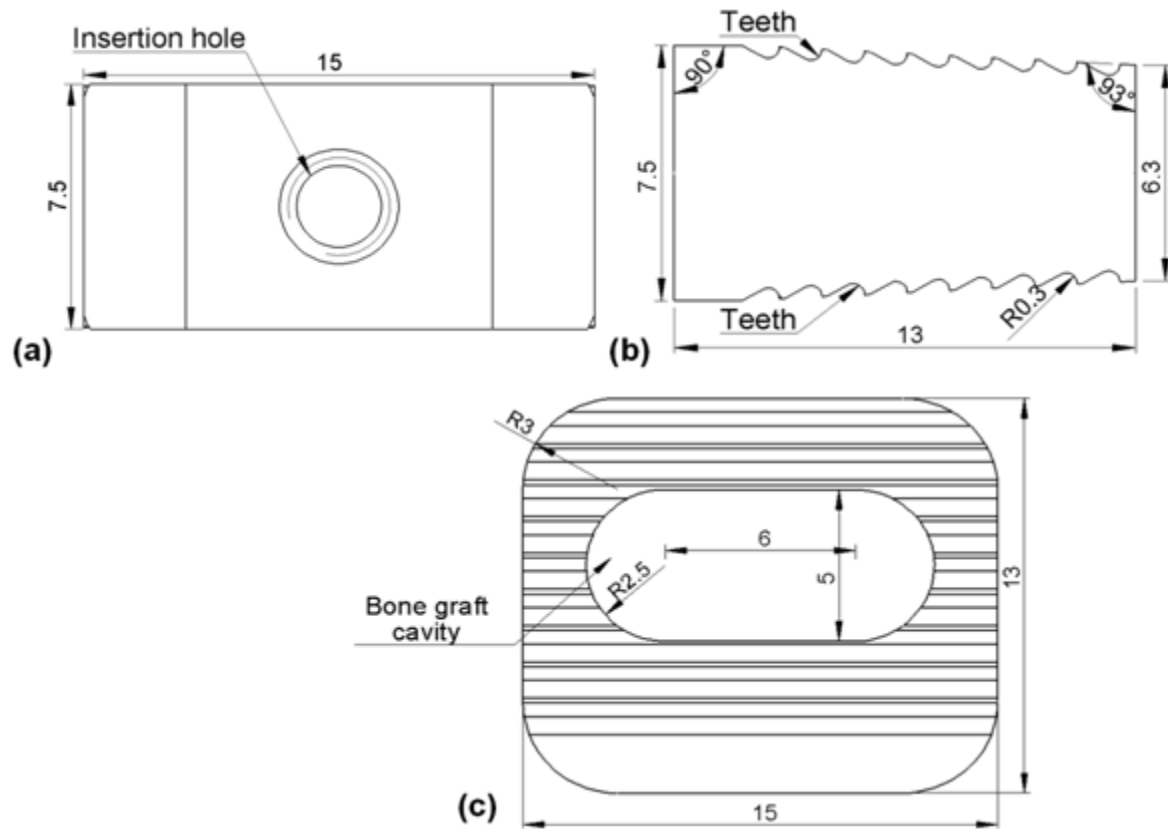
2. RABEA cervical fusion cage (CPPK081214) made from PEEK (Surgicraft Ltd., Redditch, UK). (a) Side view, (b) top view and (c) three-dimensional view.
